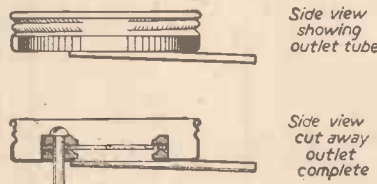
Side view of pump body. Fig. 7.—Cut away view showing valve in section.
